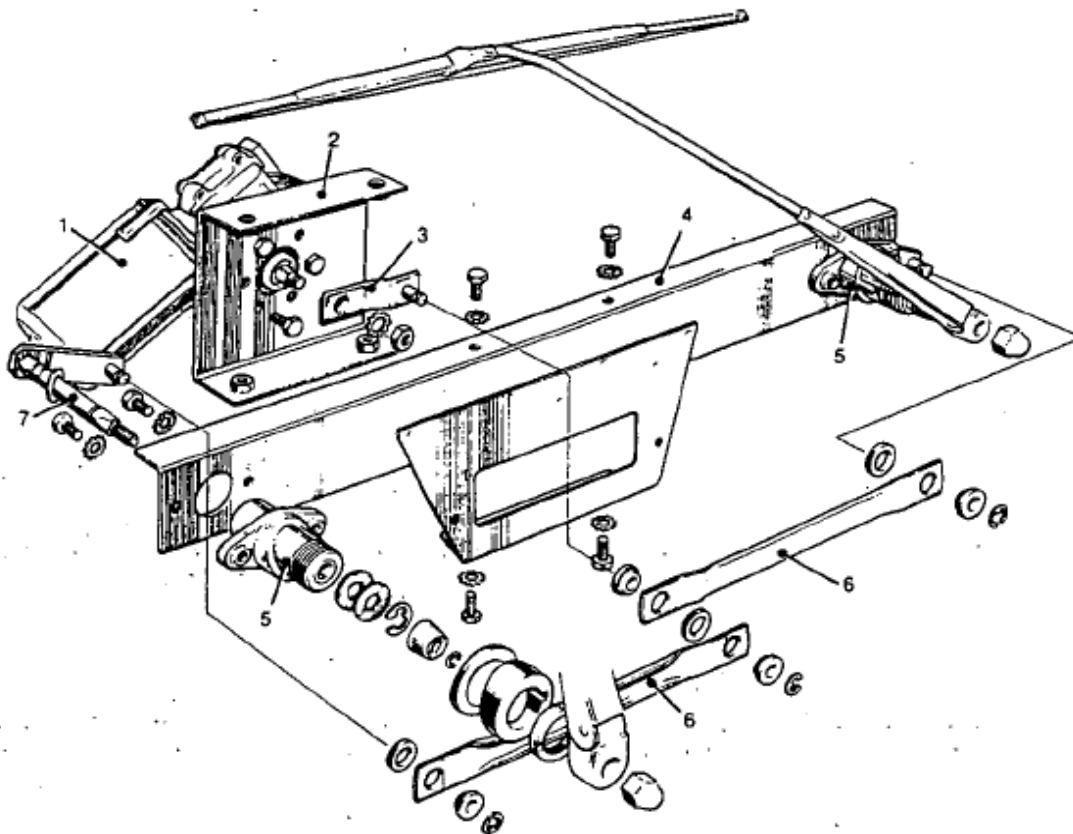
Wiper motor, links, pivot housings and mounting bracket
